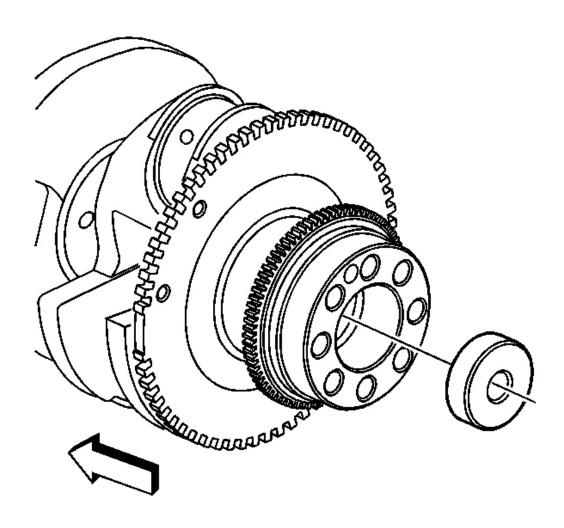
View Of Clutch Pilot Bearing Courtesy of GENERAL MOTORS CORP.
